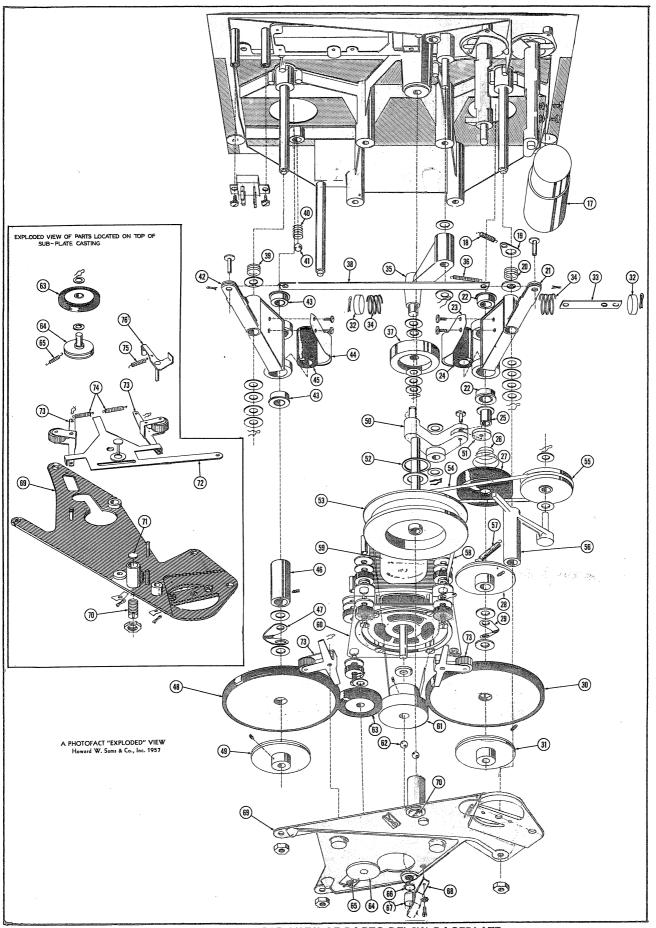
B, EXPLODED VIEW OF PARTS BELOW BASEPLATE.
